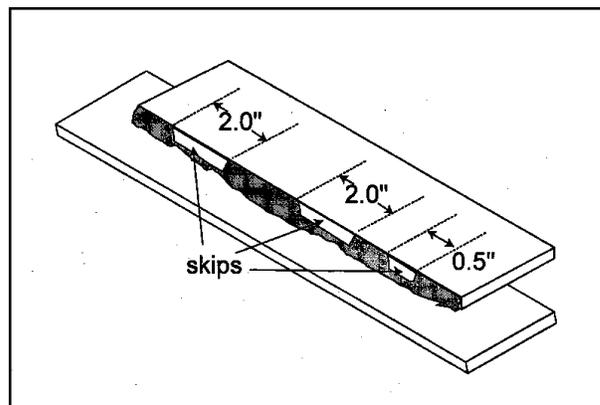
Illustration of a weld receiving a fusion rating of 4.
